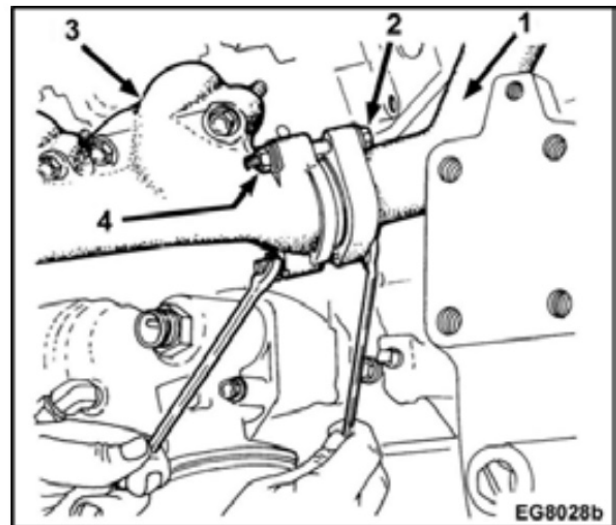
Installing Left Exhaust Tube Mounting Hardware at Exhaust Manifolds
